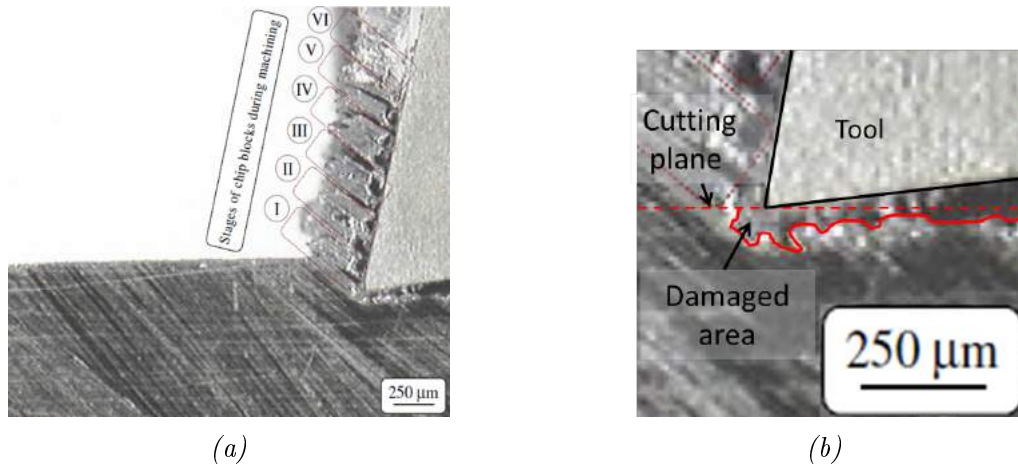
(a) Machining induced damage for fibre orientation $\theta=45^\circ$ [34]; and (b) magnification of the tool-workpiece interaction area.
